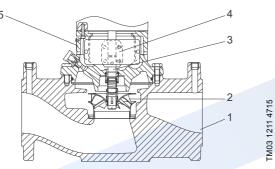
Sectional drawing of TP Series 200 with flange connection
